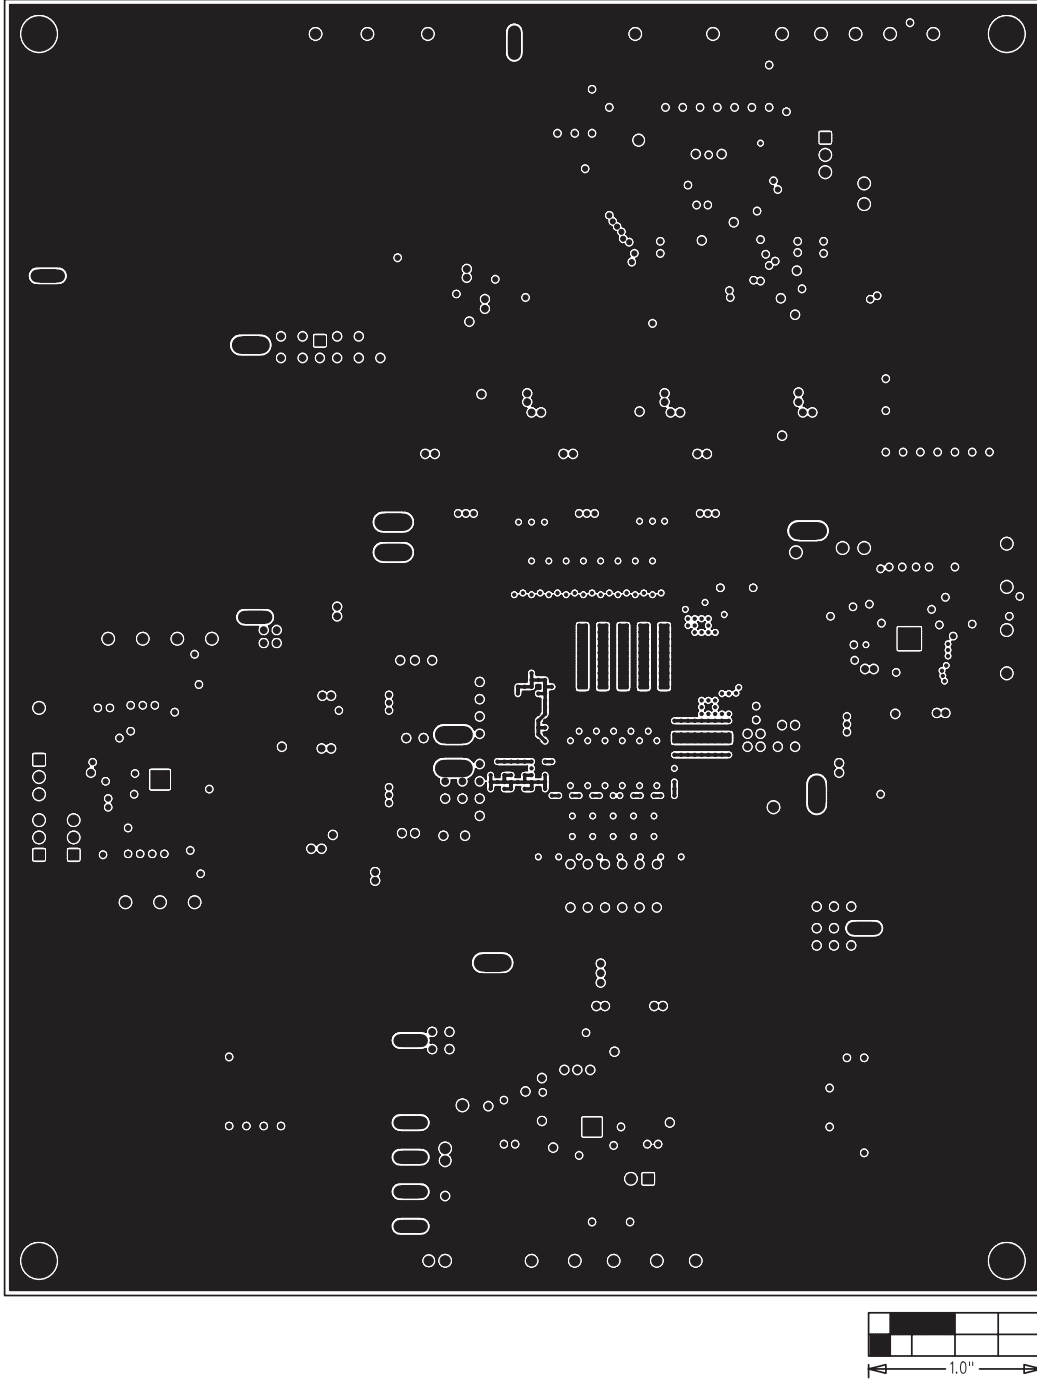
MAX17030 EV Kit PCB Layout —Internal Layer 7 (PGND Layer)
